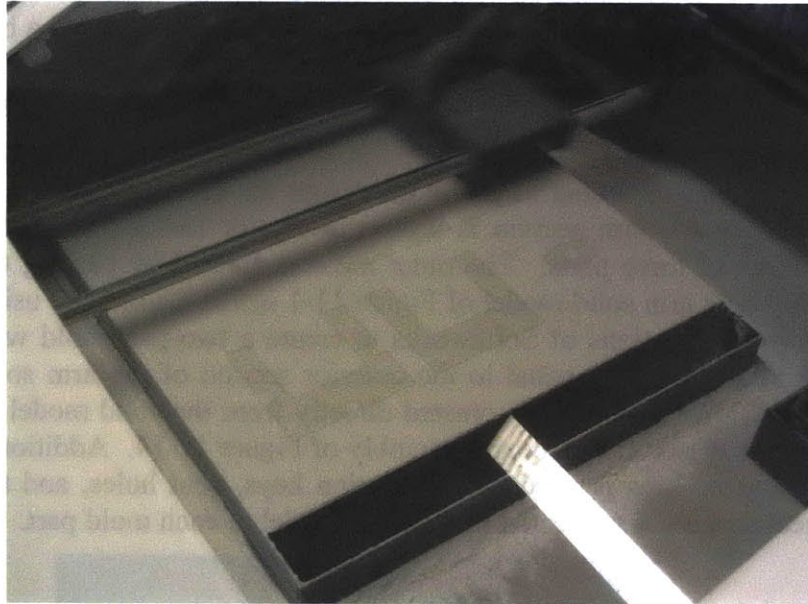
The Printing of the Silicone Arm Molds on a Z Corporation Z510 3D printer.
